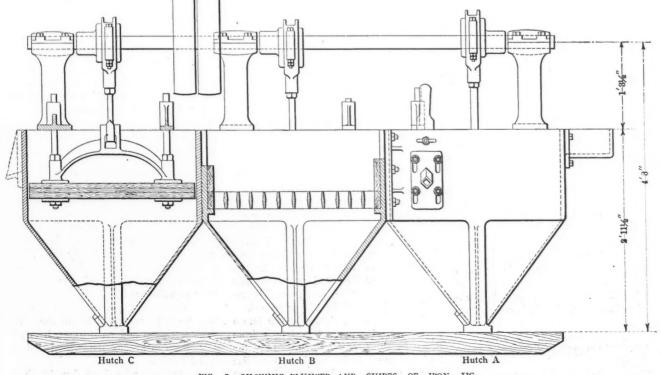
SHOWING PLUNGER AND GUIDES OF IRON JIG
